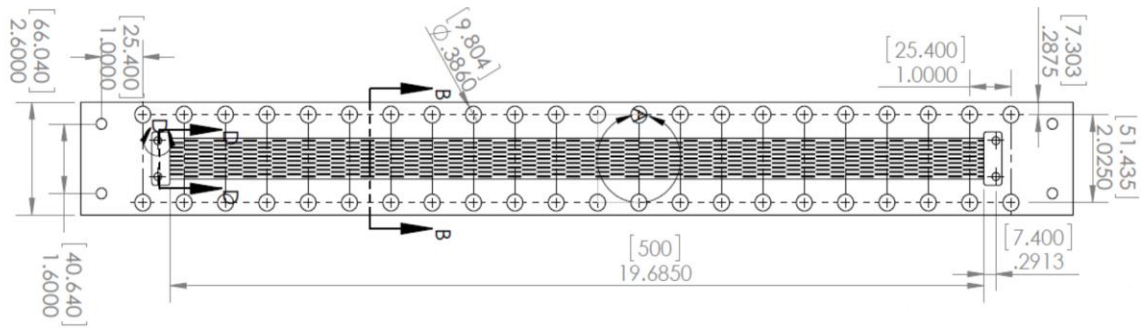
Drawing of the offset rectangular fin PCHE test plate showing inlet and outlet manifolds, bolt holes, and other relevant dimensions in inches [mm]
